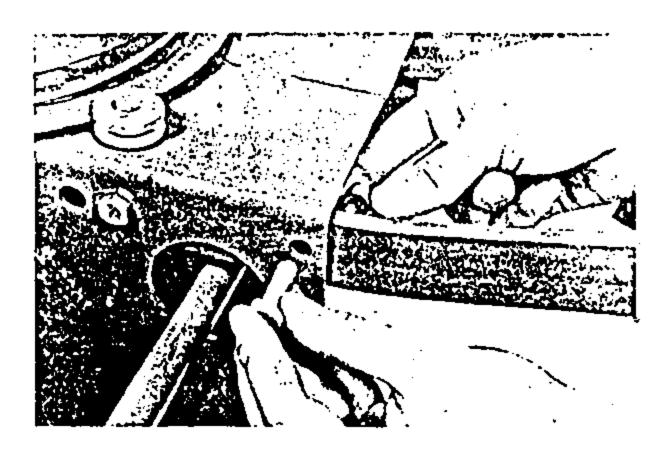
Secure Mounting Frame to Snowthrower Housing
